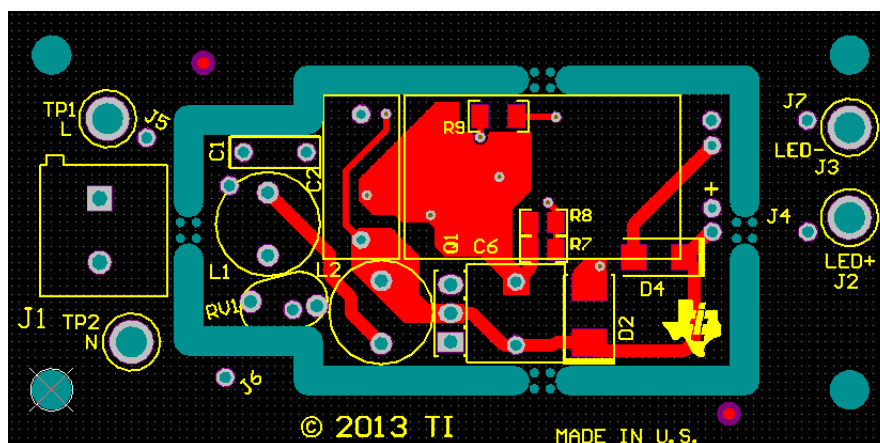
TPS92075 Buck EVM Top Layer Assembly Drawing (Top view)
